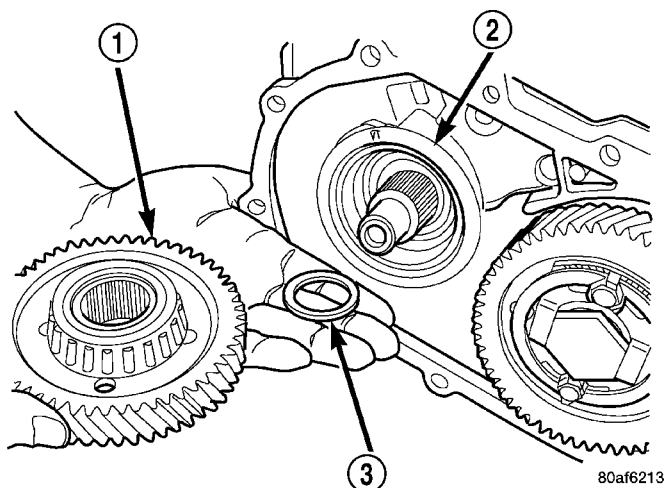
Install Transfer Shaft Gear and (Select) Shim
